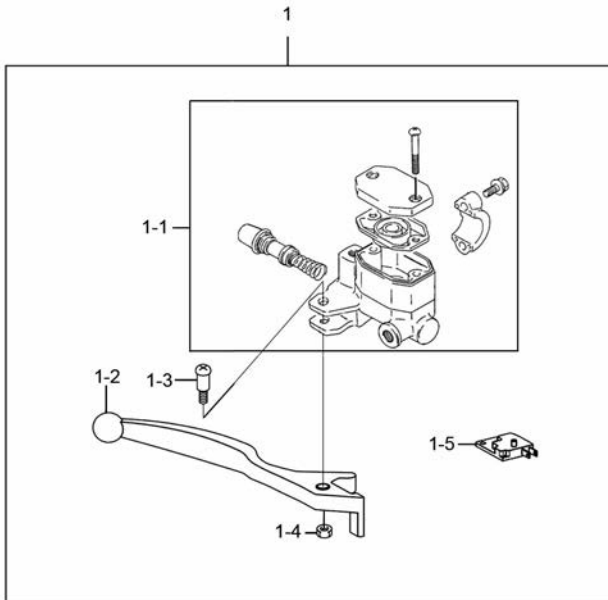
FRONT BRAKE CYLINDER (P03-S430-0012)
